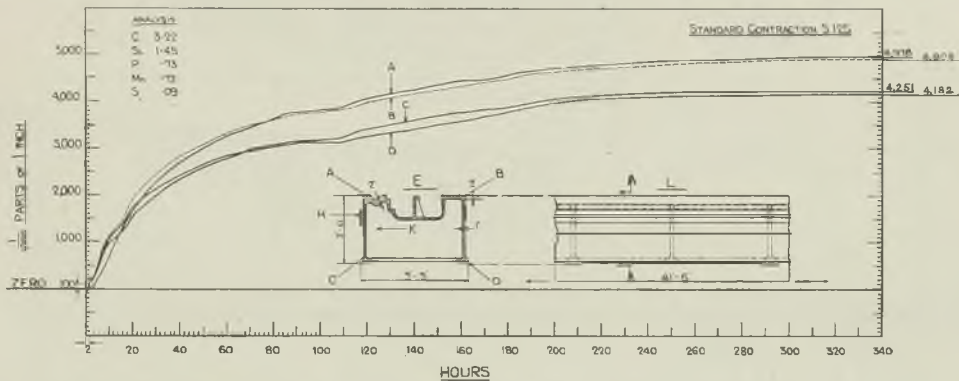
COMPLETED COOLING BEHAVIOUR OF THE ROLL-GRINDING MACHINE BED.
